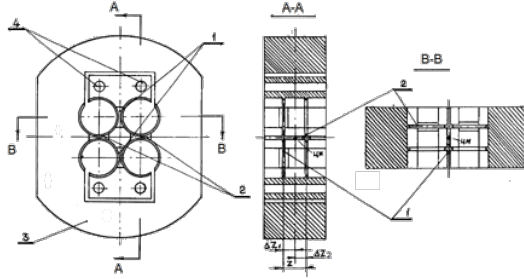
General view drawing of the rotor of the modulating hybrid MMG
